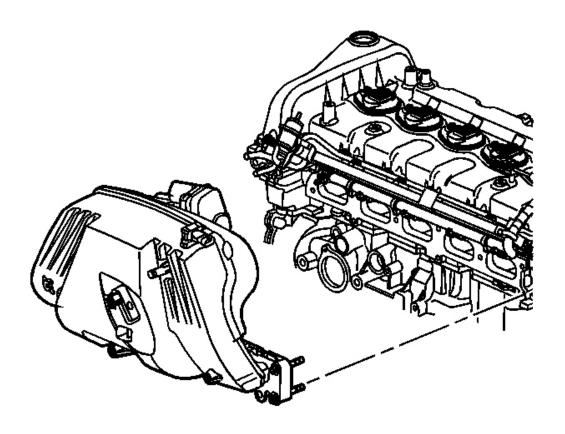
View Of Intake Manifold Courtesy of GENERAL MOTORS CORP.
